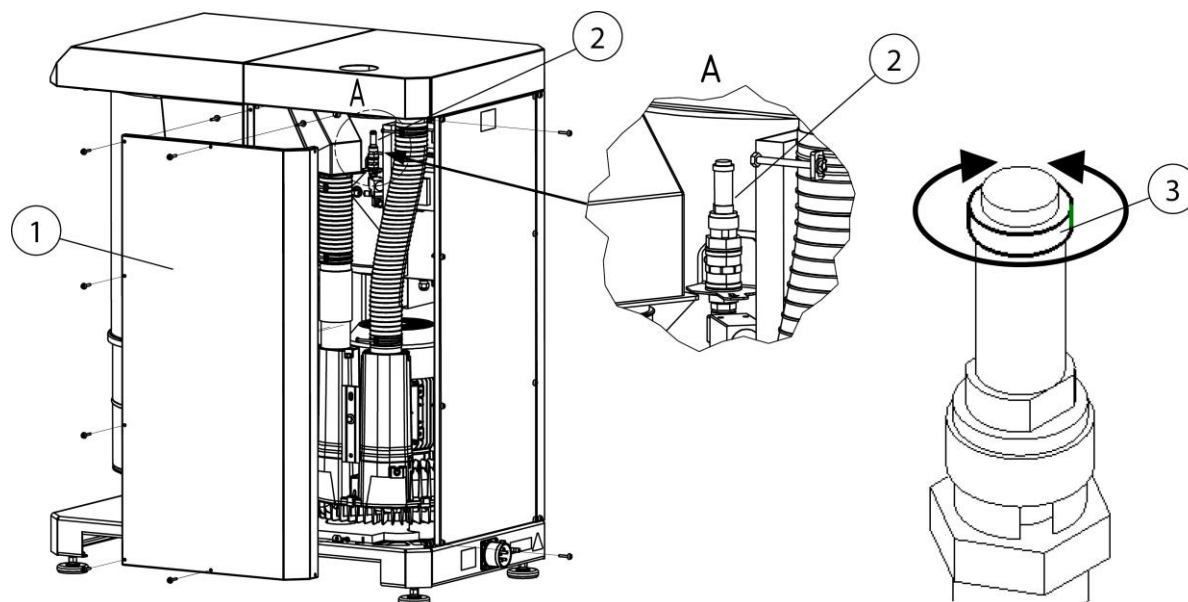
Access to the compressed air vessel + compressed air safety valve
